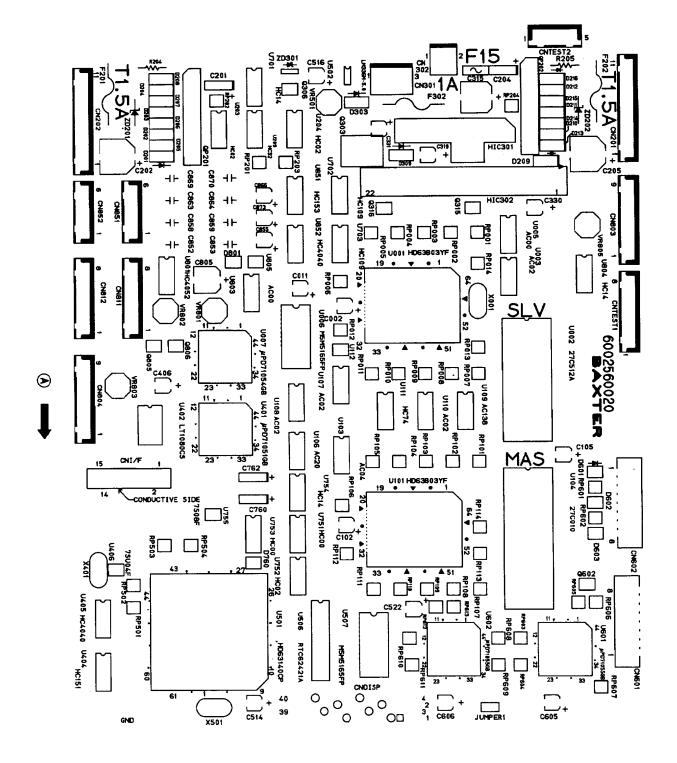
(Sheet 1 of 2). CPU PCB - Component Side
